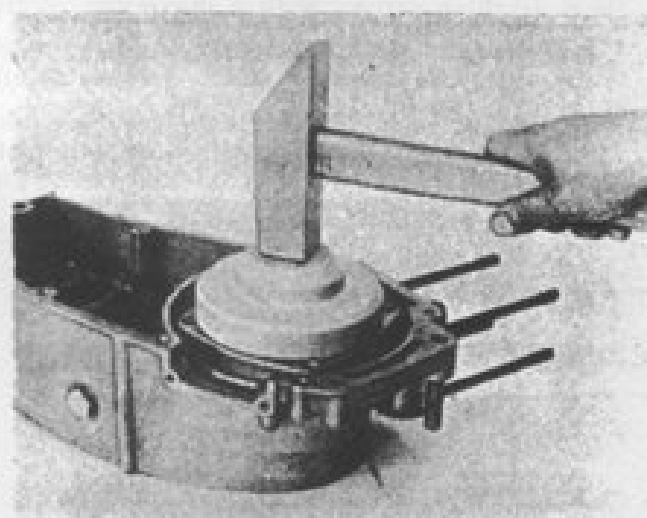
Pressing-in the crank chamber cover, HX-10-3 motorcycle.
